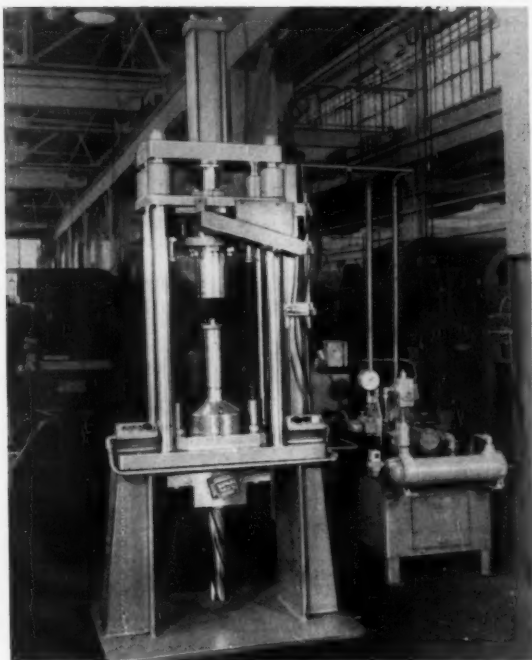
Vertical hydraulic press equipped to broach teeth in cast-iron helical gear
